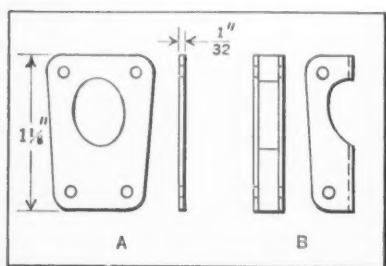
U-shaped Clasp Blanked and Formed in the Die Shown in Figs. 2 and 3
